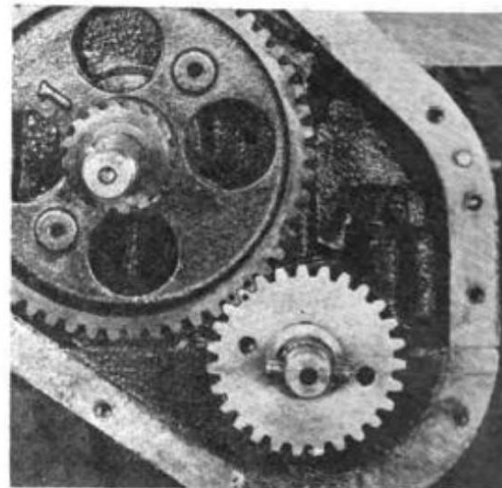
Timing and Generator Gears Exposed and Showing Punch Marks on Camshaft and Crankshaft Gears Facilitating Timing.
